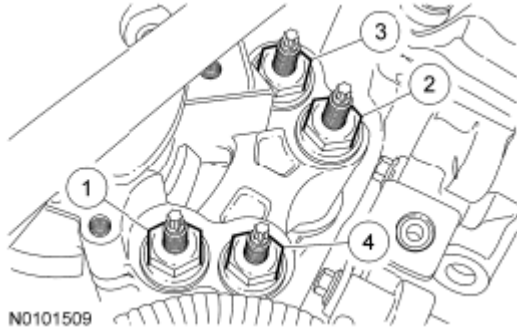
Locating Engine Mount Spacers & Engine Mount Nuts
